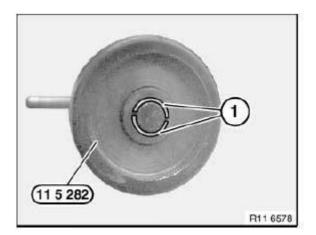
Identifying Valve Keys And Special Tool 11 5 282 Courtesy of BMW OF NORTH AMERICA, INC.
